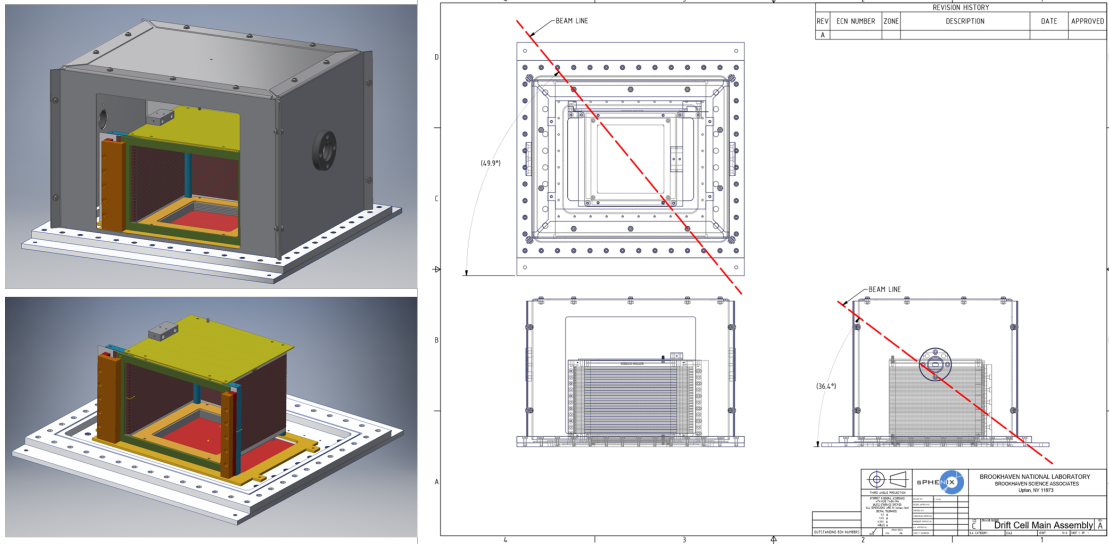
Left: 3D model of compact TPC prototype. The detector consists of a 10cm x 10cm x 10cm field cage, and a 4-GEM readout with a zigzag sense plane, housed in an aluminium sheet metal enclosure which provides the gas seal. Right: Engineering drawing of the TPC prototype showing the maximum angle of incidence for tracks entering the detector volume defined by the size of the entrance and exit windows (made of mylar).
